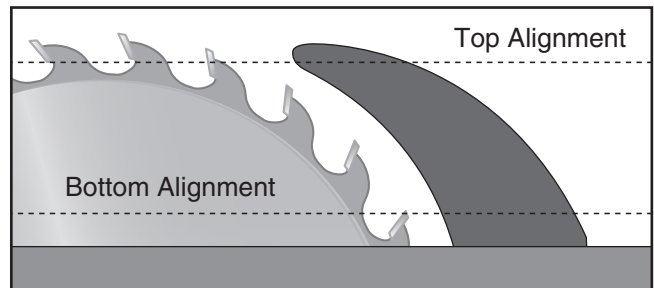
Checking spreader/riving knife alignment with blade at the top and bottom.
